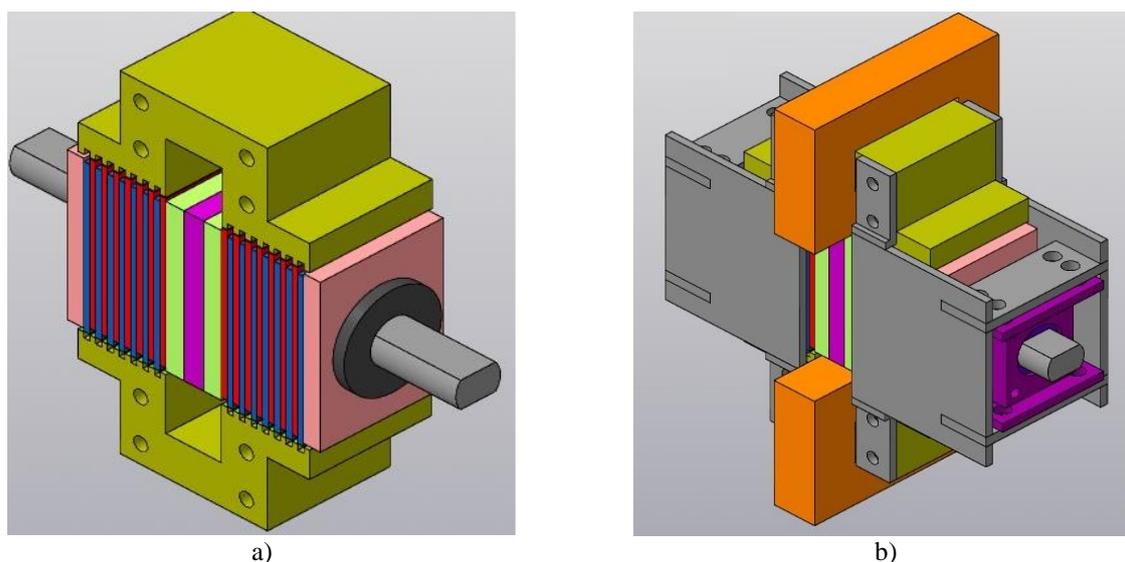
Linear generator: a) rotor with the stator packages; b) generator assembled.
